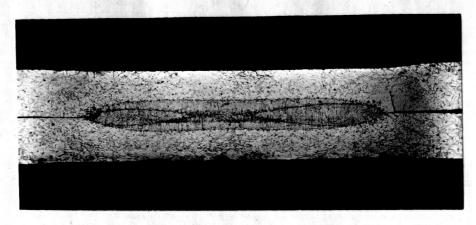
Cross- sectional view thru the cemterline of spot weld No. 2 (see Fig. 1). Note the secondary weld nugget which is the result of extended welding time when a pulsating current resistance spot weld machine is used. The fatigue load was applied to the top sheet and directed to the right. This crack was detected by radiography.
